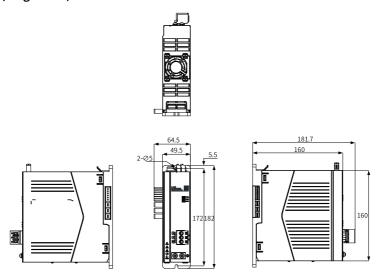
Overall and mounting dimensions of the single-axis drive unit (unit: mm)
